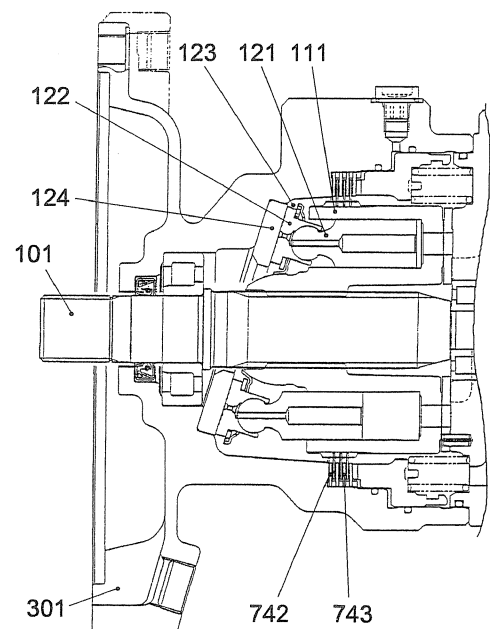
Drawing cylinder block (111), piston sub assy, friction plate (742) and separator plate
